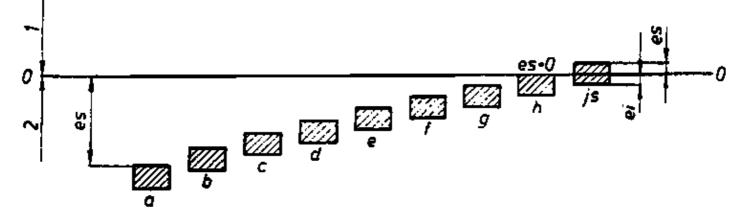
Location of the tolerance zones between a to js (shaft)
